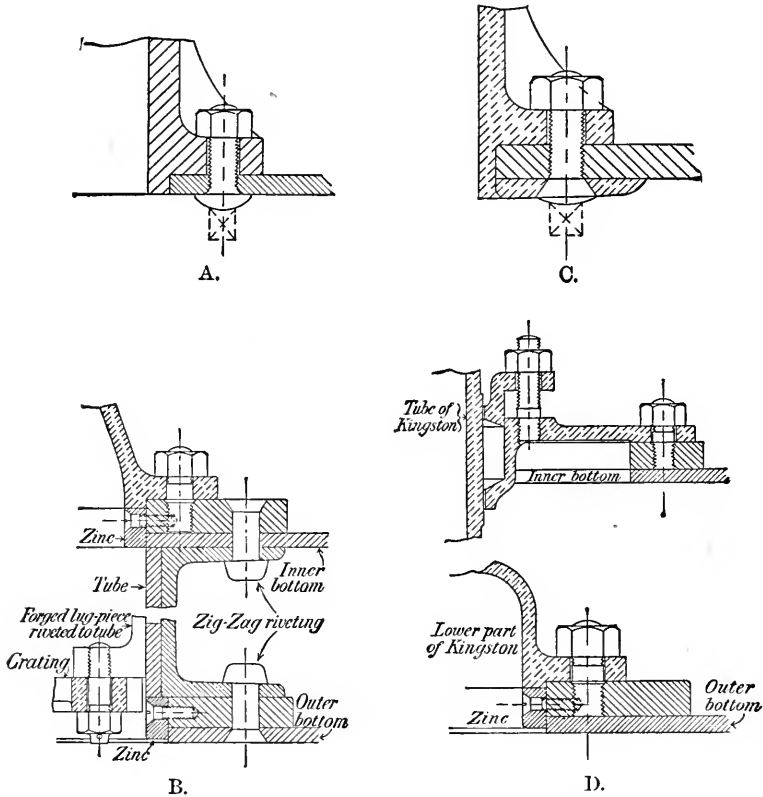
Details of Inlet Valves (in Steel Ships).
